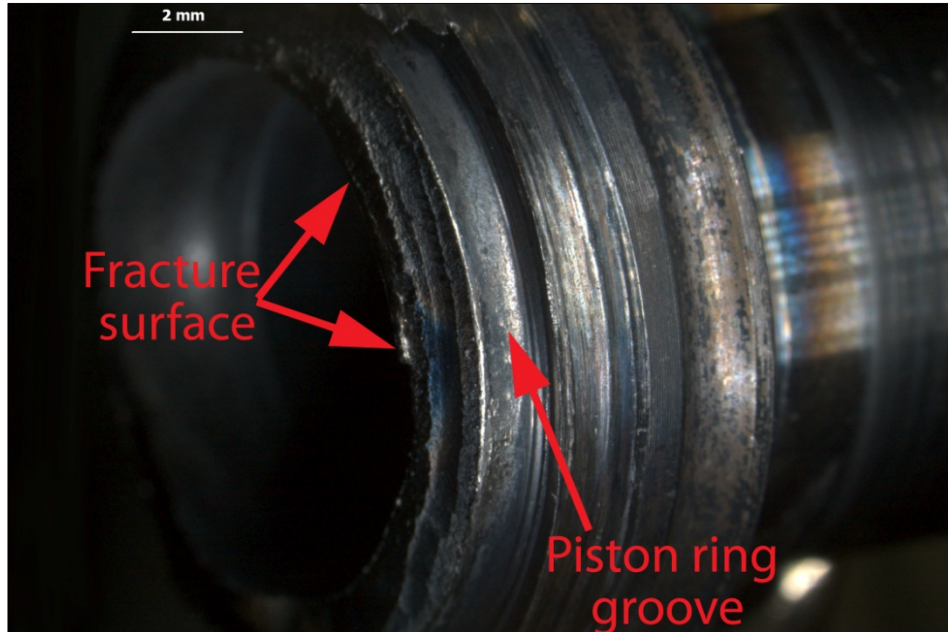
Side view of the turbine shaft fracture (YEO30243) showing location of failure with respect to the piston ring groove.
